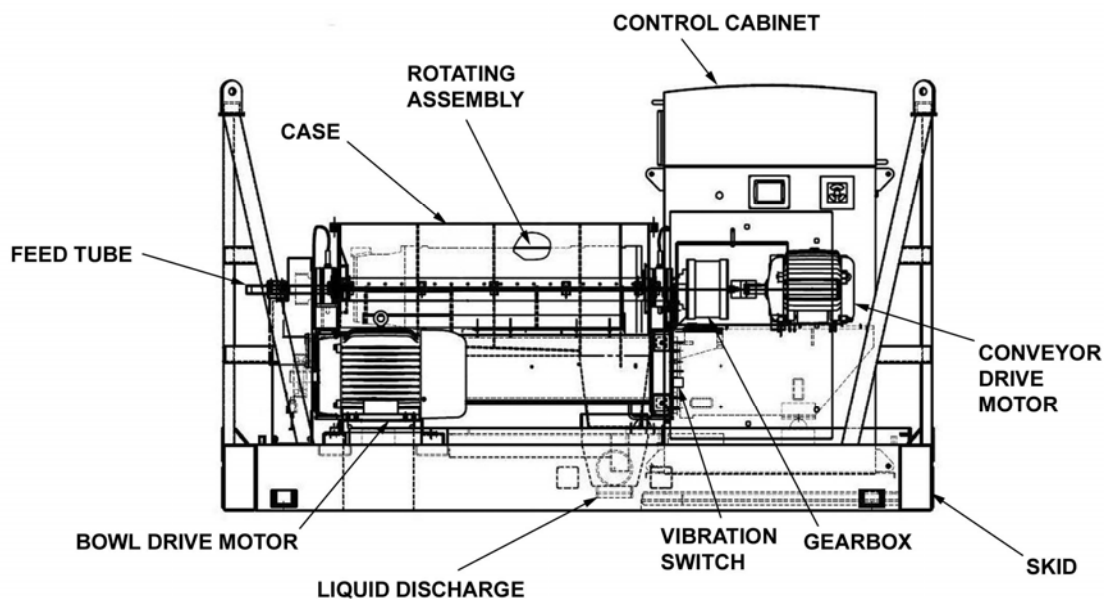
DE-1000 VFD Centrifuge Main Components
